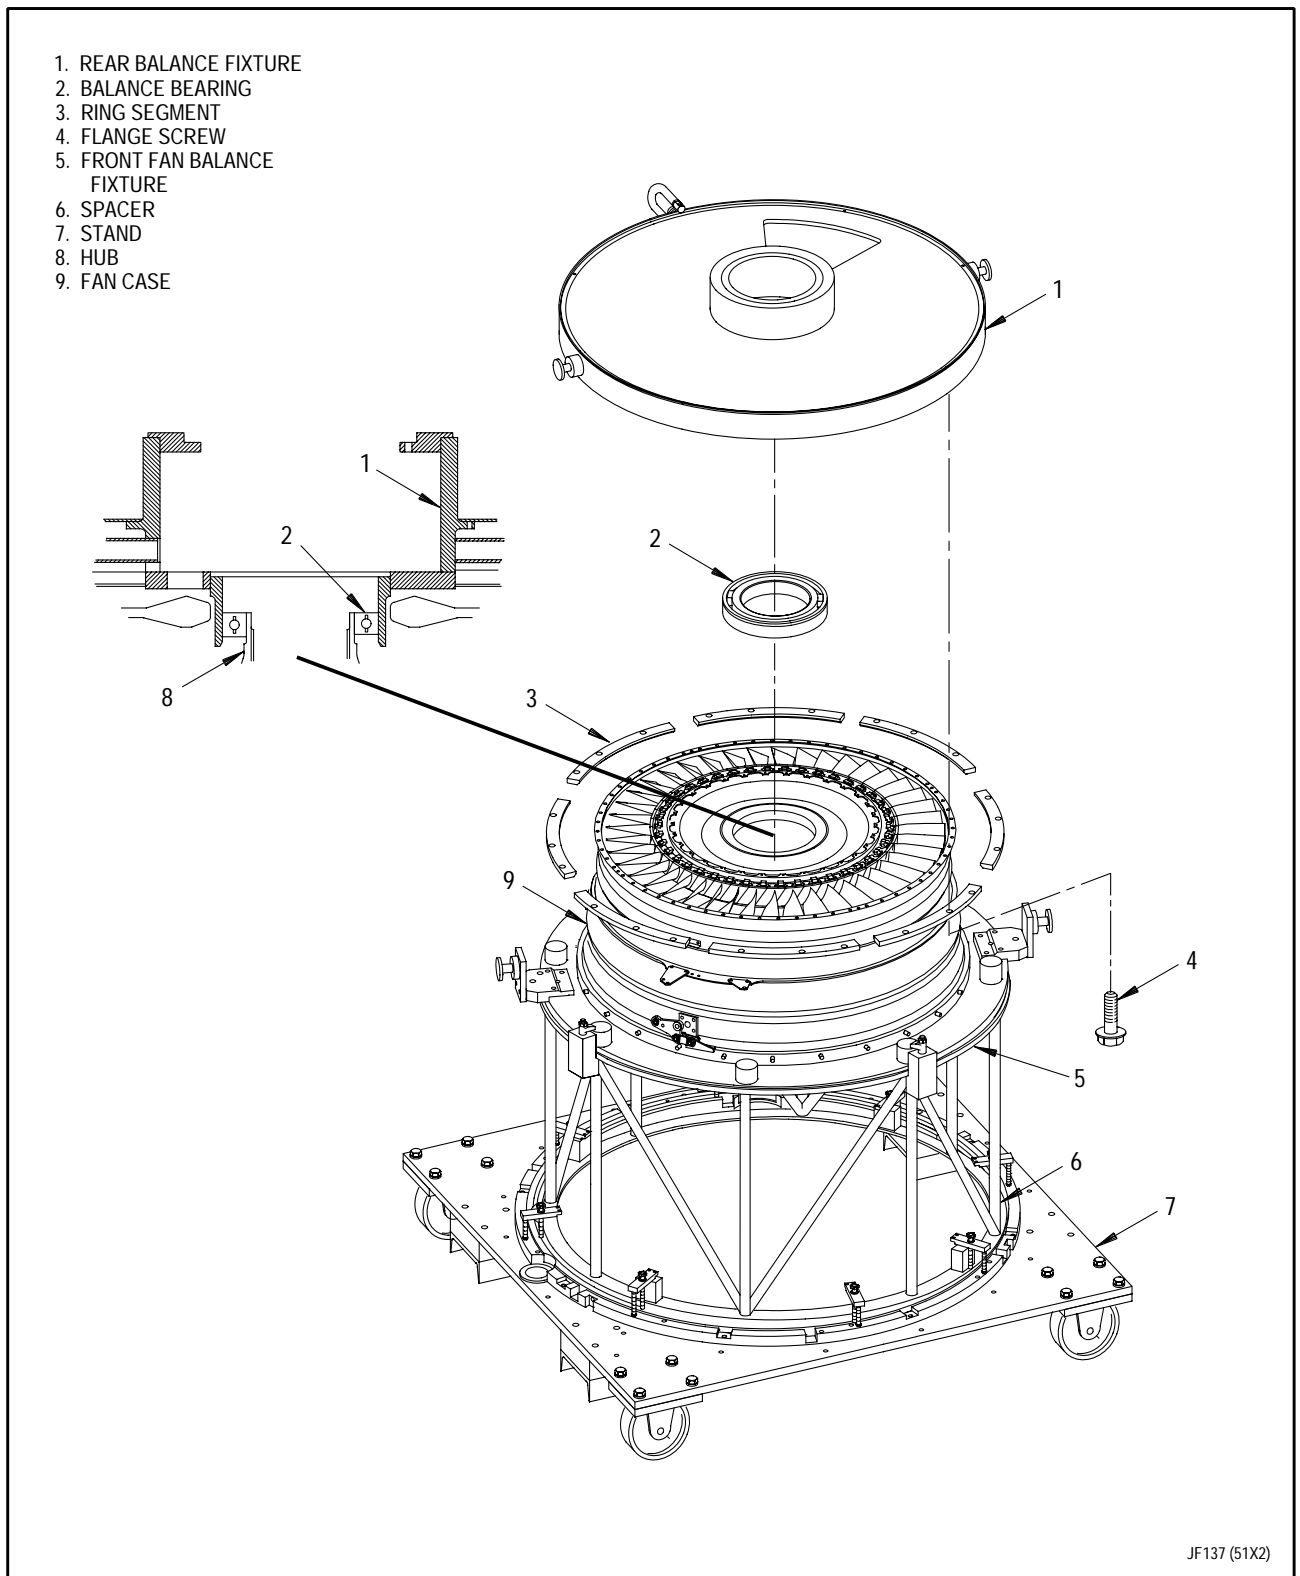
Front Compressor Rotor and Stator Assembly - Installation of Dynamic Balancing Tools
